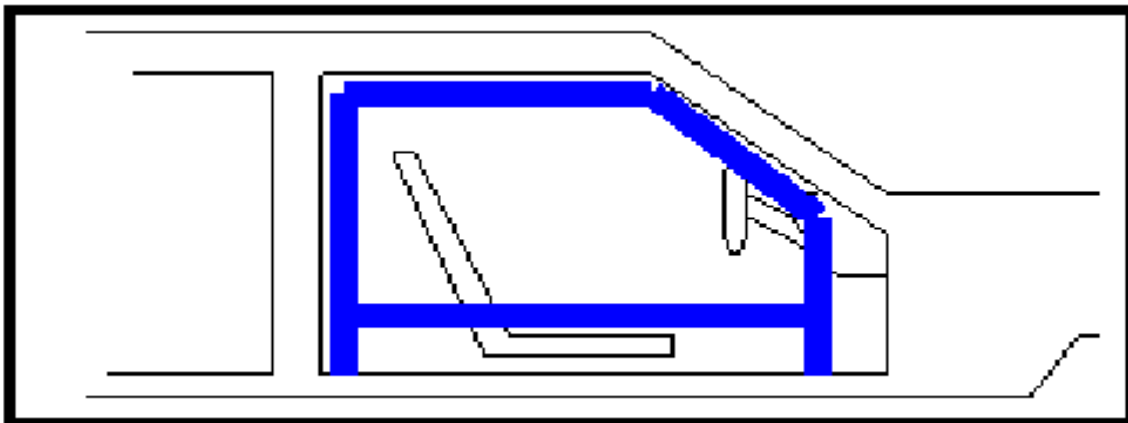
MUST BE CONSTRUCTED TO THIS DESIGN OR BETTER
